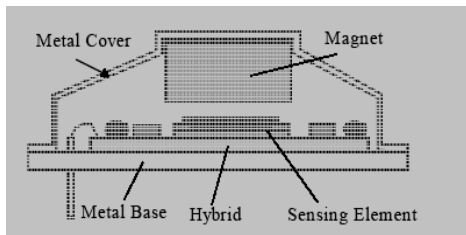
; Bosch metal header cross section, showing the permanent magnet suspended over the sensor chip.
